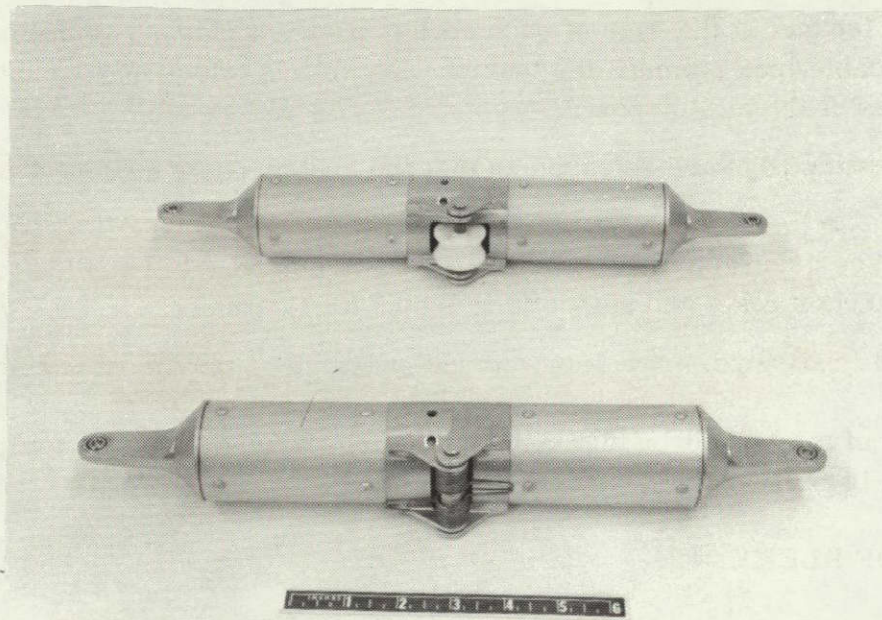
Test Specimen — Tension and Torsion Spring Hinge — Deployed
